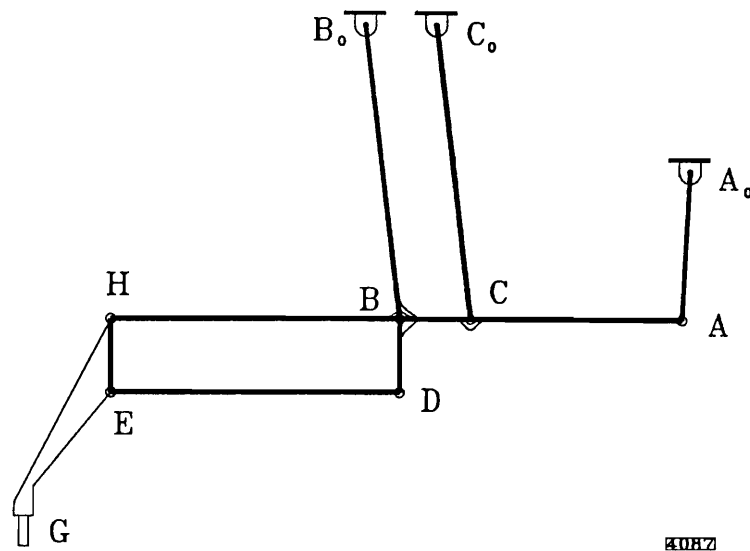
Mechanism for the Automatic Assembly of Parts [5].
